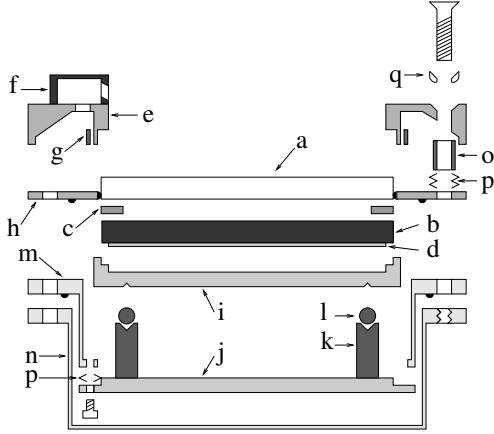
Assembly of the experimental convection cell. See text for a detailed description. a) sapphire top plate; b) cell bottom plate; c) sidewall; d) bottom-plate heater; e) flow distributor; f) jet; g) clamping ring; h) top-plate holding-ring; i) hardened steel plate; j) bottom support plate; k) legs (passive or with piezo-electric transducers); l) ceramic balls; m) cell-bottom-assembly holder; n) can; o) sleeve; p) spring washers; q) ball washer.
